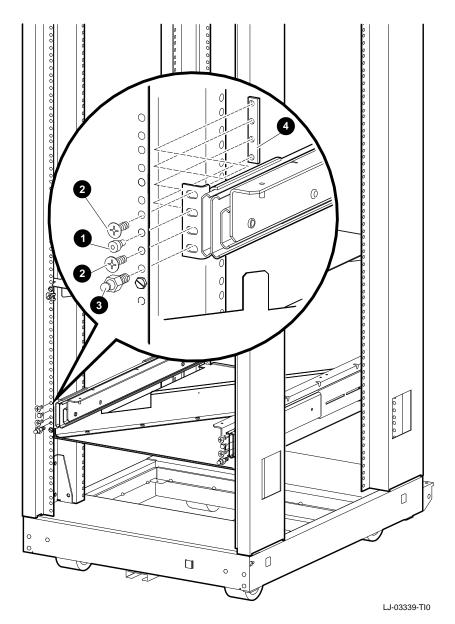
Installing the Right/Left Side Chassis Slide Assembly and Ball Studs
